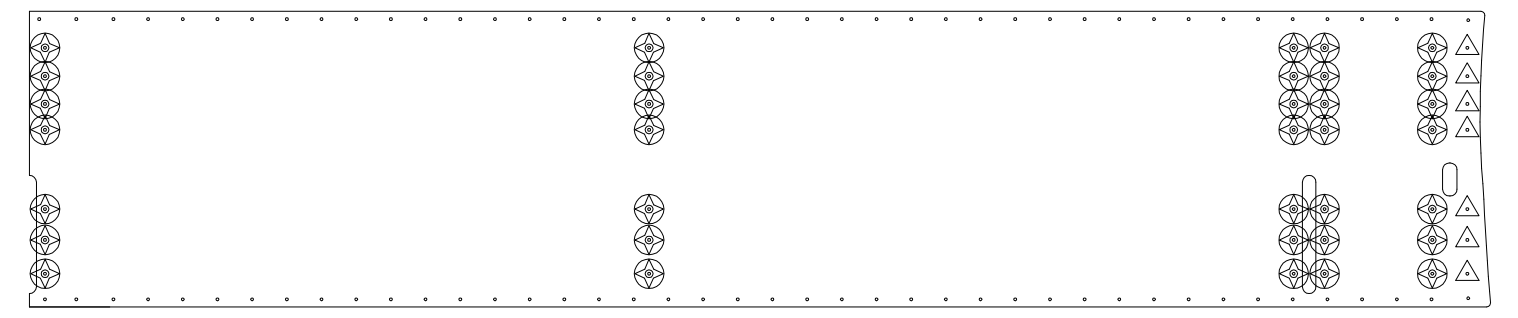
FL-1001A-L INBOARD NOSE SKIN RIVETS
